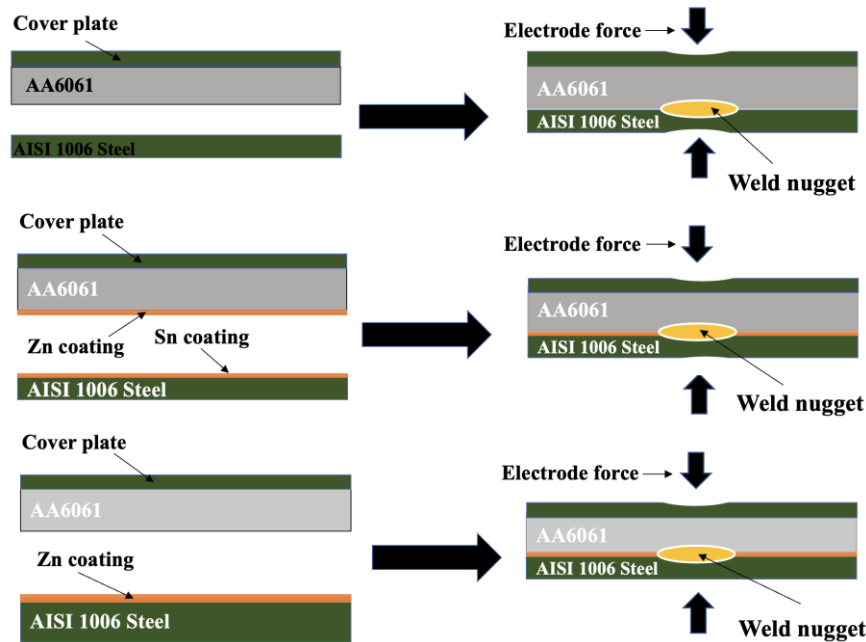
Welding procedure for the specimens (a) as-weld. (b) coating both sides (c) coating one side
